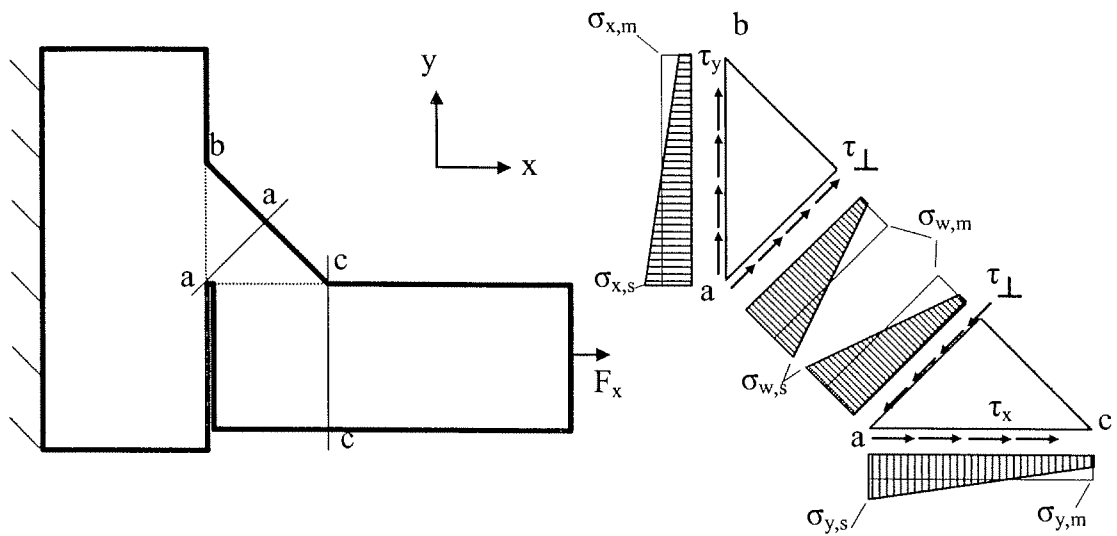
Weld stresses in the fillet welded detail.
